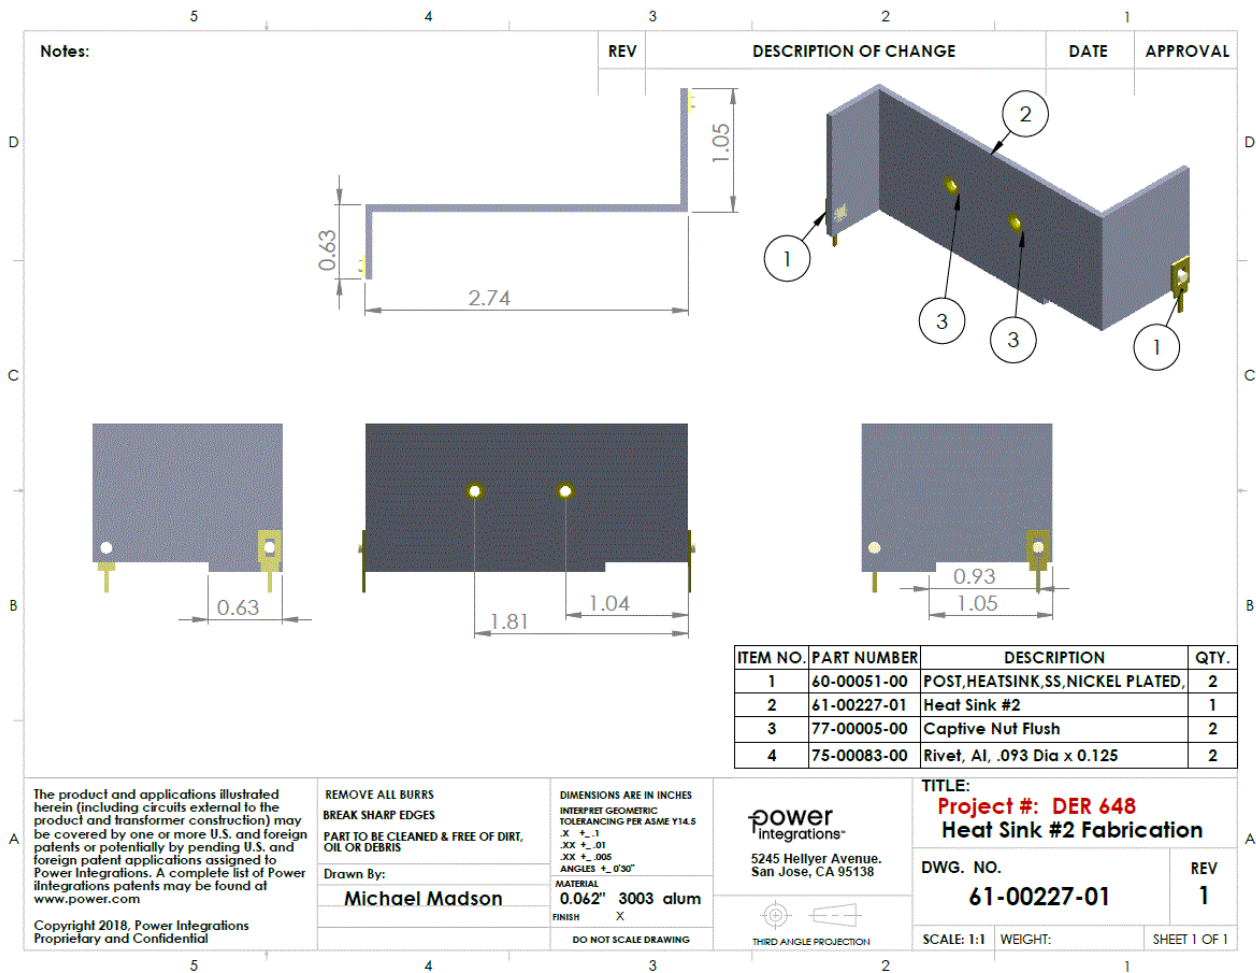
Finished Secondary Heat Sink with Installed Fasteners.
